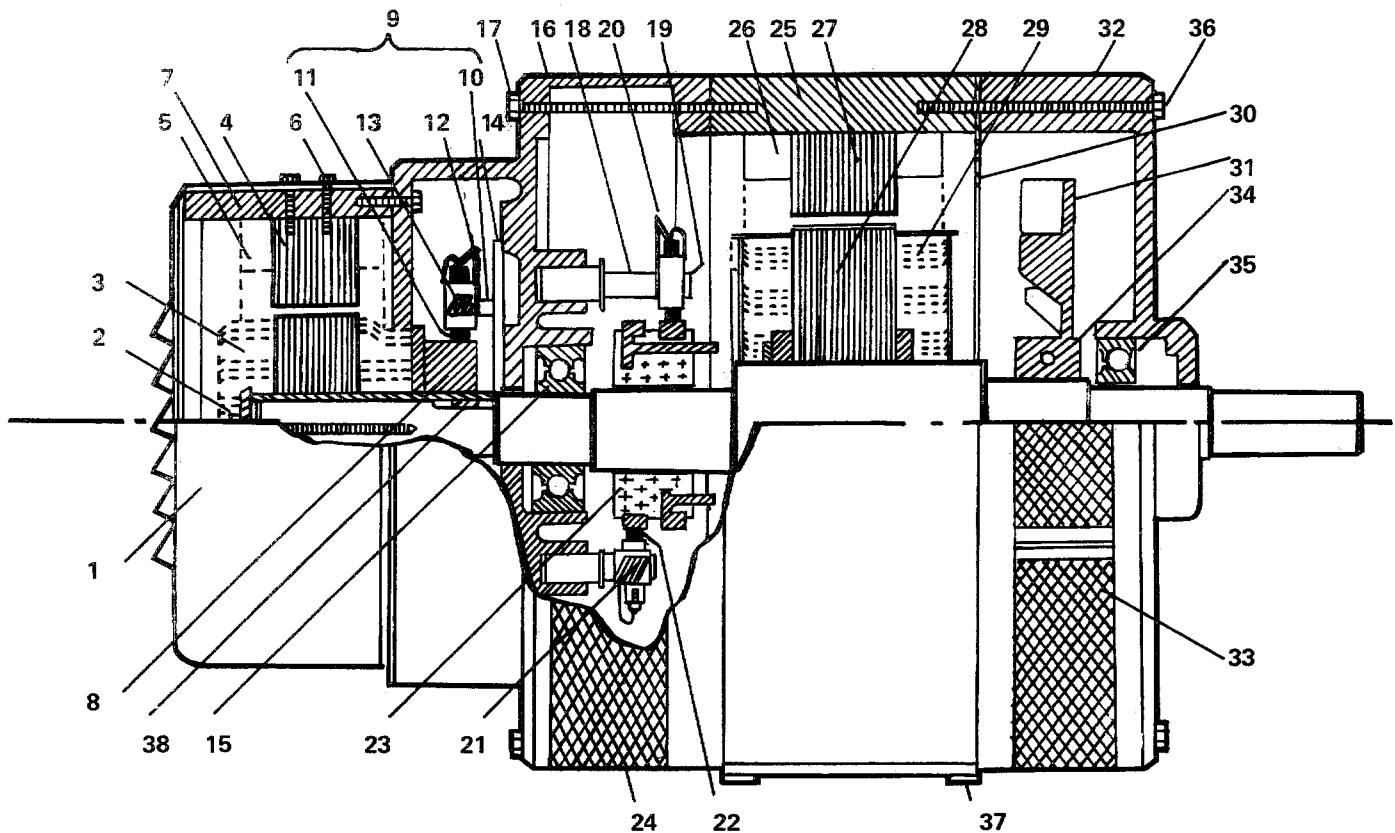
CROSS SECTIONAL VIEW - TYPICAL KATO REVOLVING FIELD TWO-BEARING GENERATOR WITH DIRECT CONNECTED BRUSH TYPE DC EXCITER.
